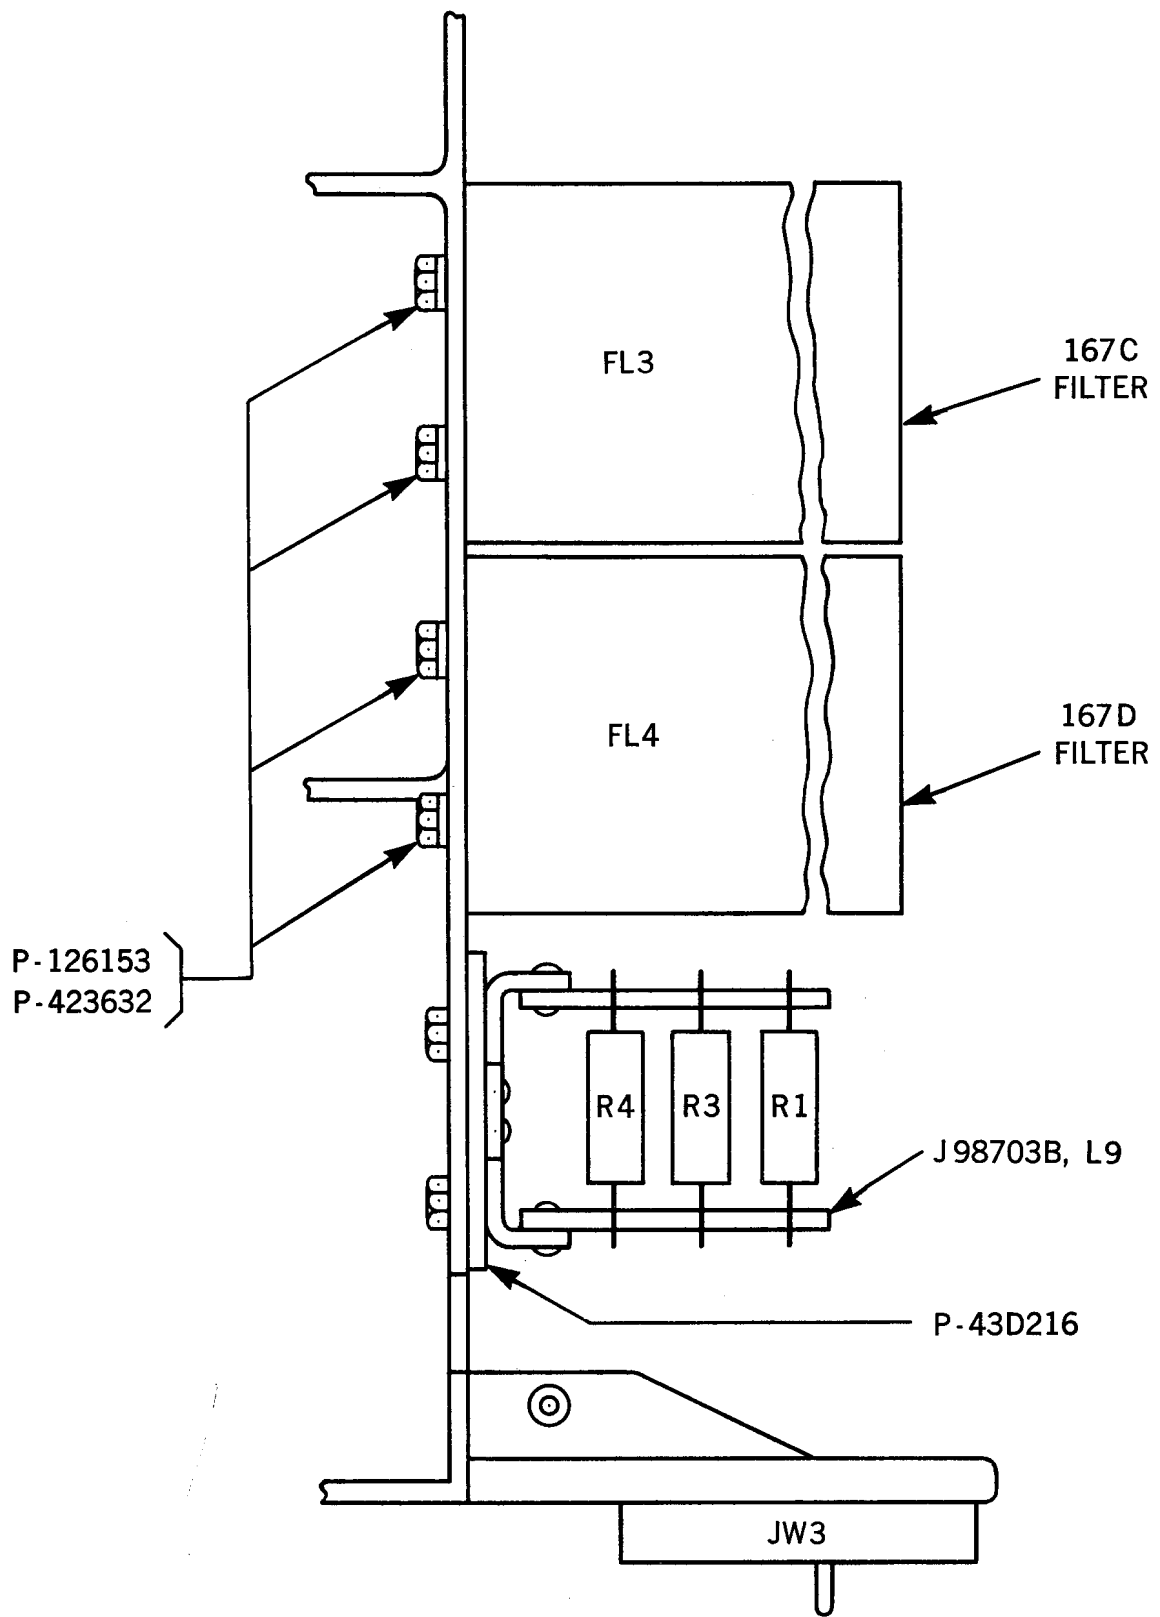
Part of Subassembly per ED-92765-30 or ED-92860-30
